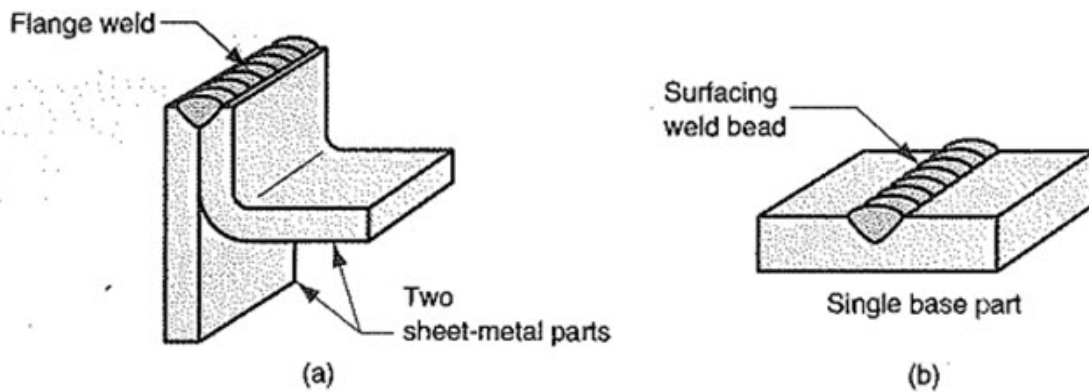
(a) Flange weld, and (b) surfacing weld.
